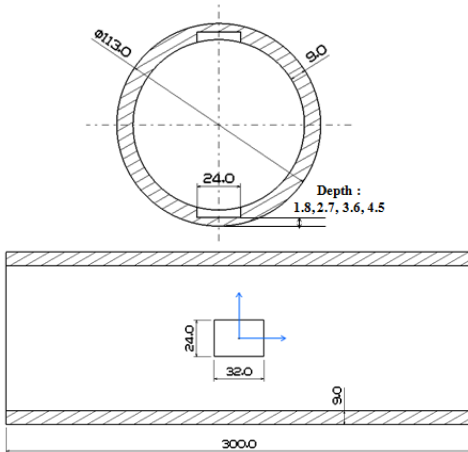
Shape of wall thinning in pipe (unit: mm)
